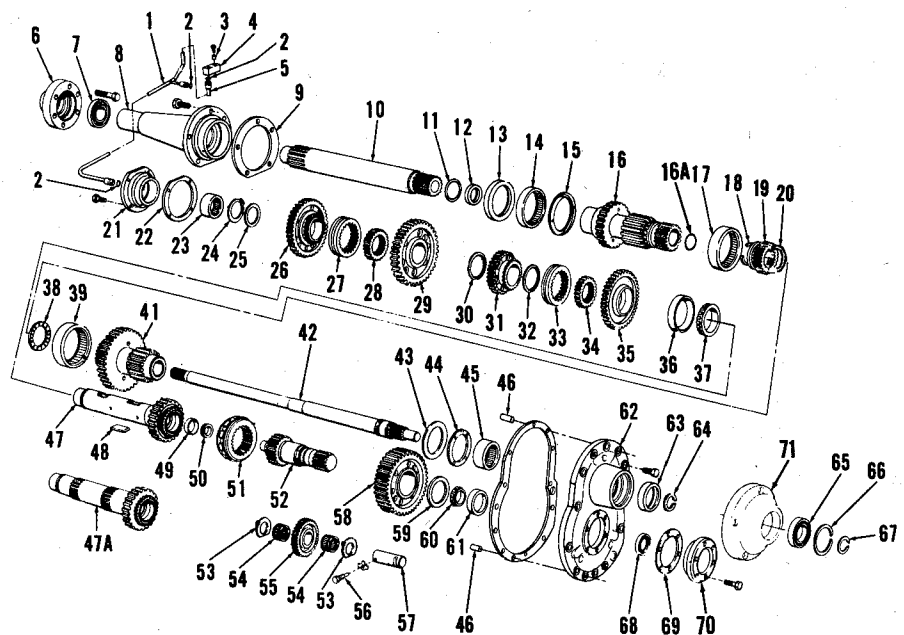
Exploded view of transmission gears, shafts and bearings with rear cover and bearing supports. Refer to Fig. 157 for exploded view showing transmission housing, top and shift covers, shift forks and rails and transmission brake linkage. Note rear cover differences in Figs. 159 and 159A. On later models except TW-10, TW-20 or TW-30, third gear (35) face is recessed and a thrust washer is fitted. Seals (63 and 68) are not used in pressure lubricated transmissions. Snap ring (64) is not used in splash lubricated transmissions. "O" ring (16A) is installed in mainshaft (16) on models without Dual Power. Oil pump (71) is only used on TW-10, TW-20 and TW-30.
